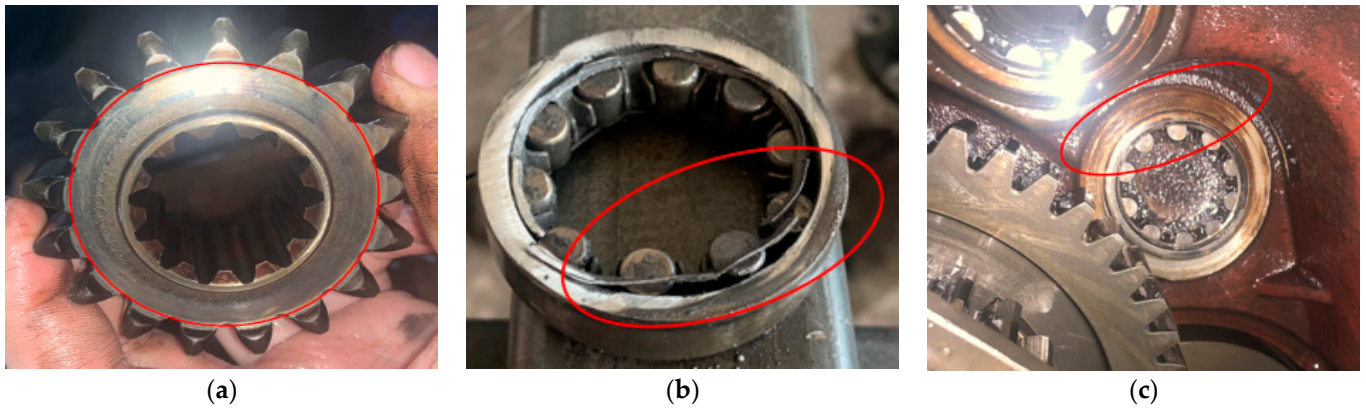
Internal damages of power shunt gear side (a), NJ205E cylinder roller bearing (b) and bearing hole wall (c).
